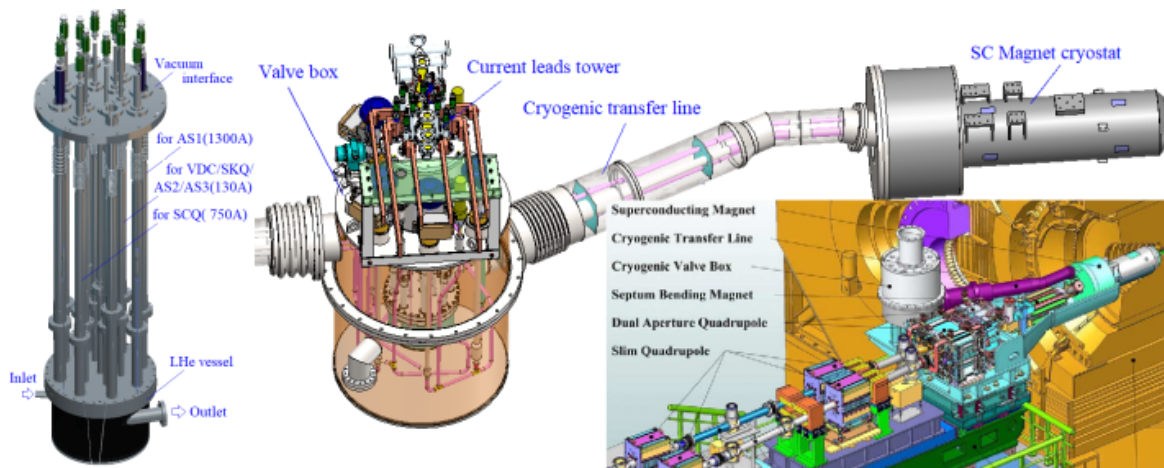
Assembly of SC magnet cryomodule and its valve box in the first IR.
